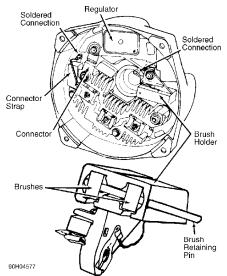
Removing Brushes (CS144) Courtesy of General Motors Corp.
